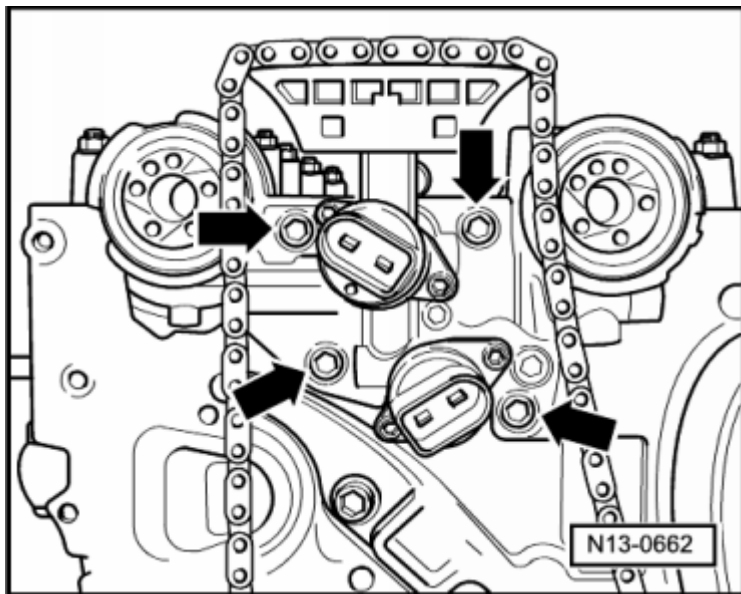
Locating Control Housing-To-Cylinder Head Bolts
